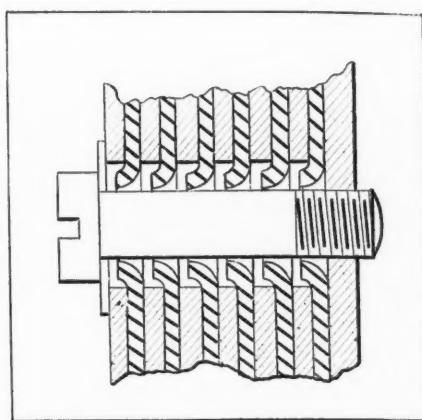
Insulating Sheets Arranged to Avoid Use of Bushing
